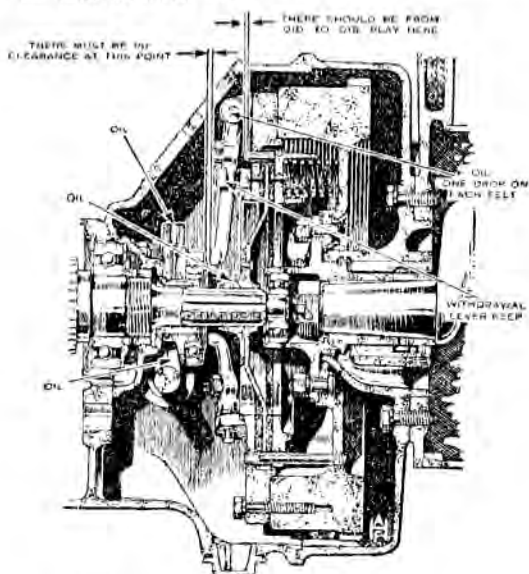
SHOWING THE OILING POINTS OF THE CLUTCH
